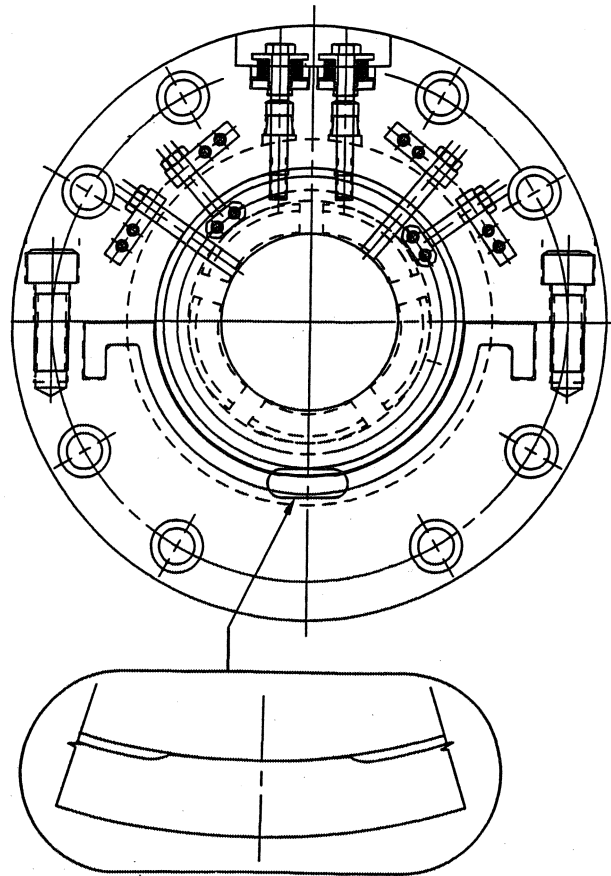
Drawing Showing SFD Spring and Probes Assemblies.
